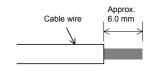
Recommended Strip Length of the Cable Wire End for Terminal Connection
